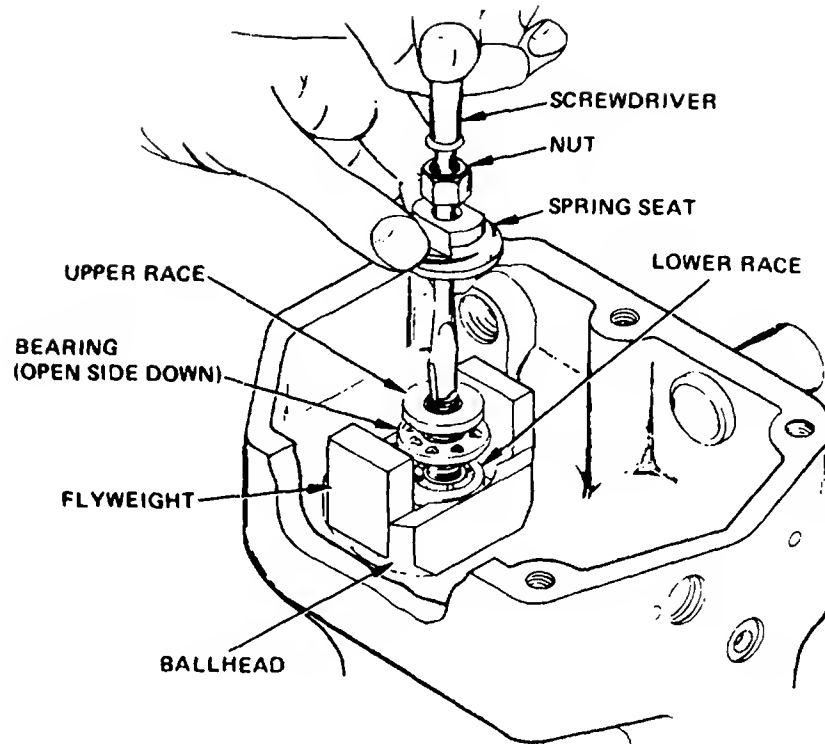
Governor Thrust Bearing and Spring Seat Assembly
